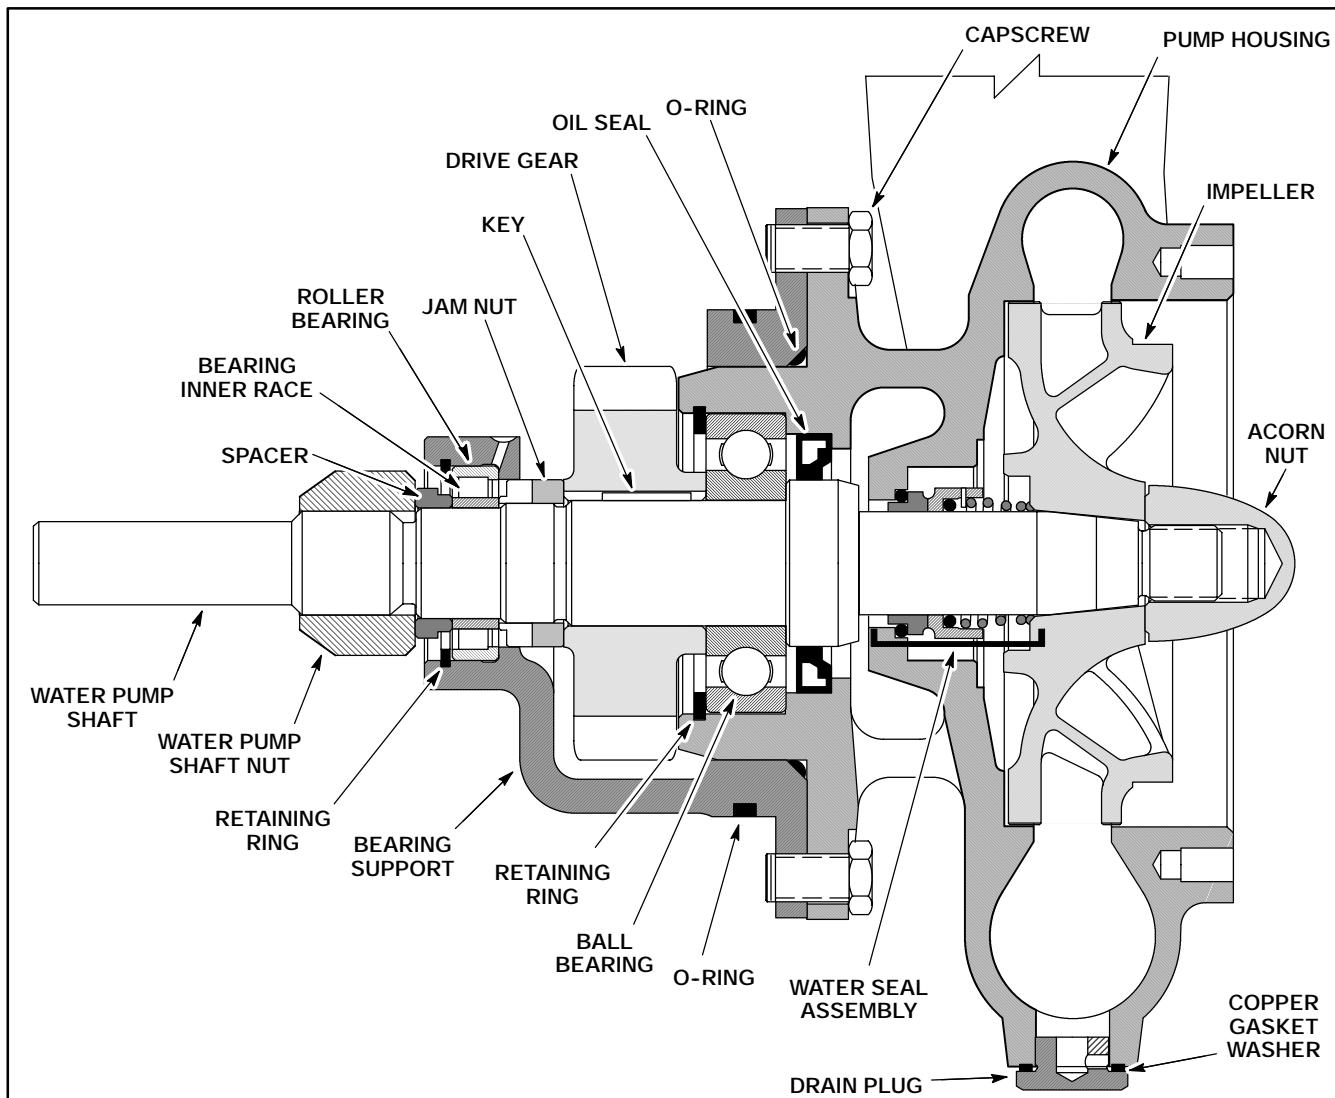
Pump P/N AC301060C For Turbocharged Engines
